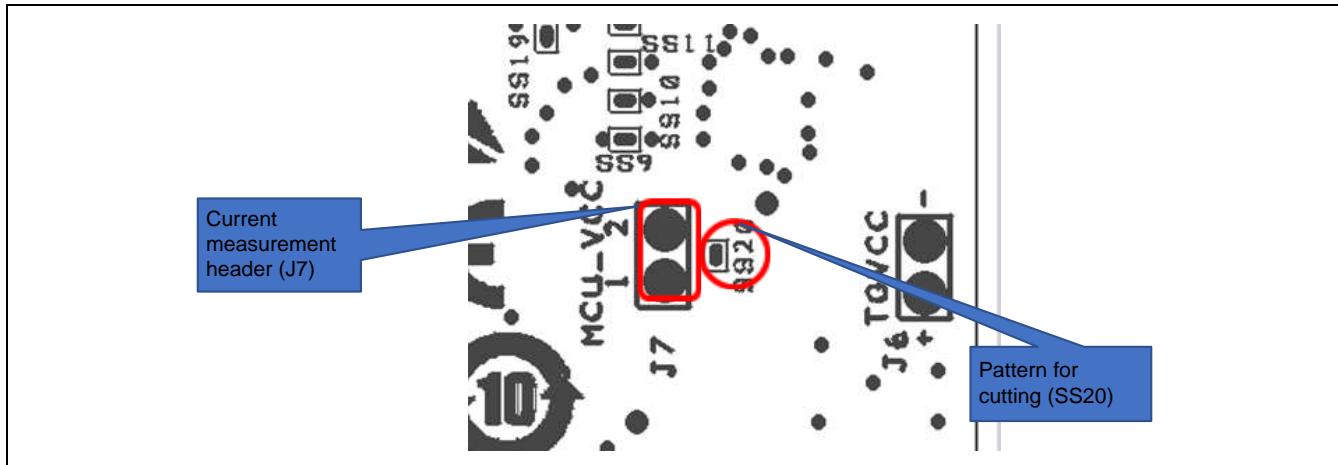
Positions of the Current Measurement Header (J7) and Pattern for Cutting (SS20) (Soldered Side)
